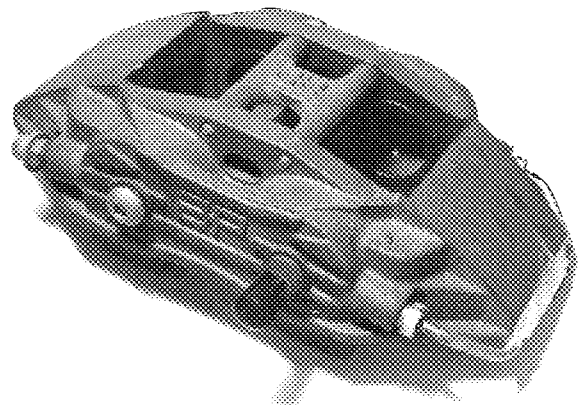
FRONT AND/OR REAR BRAKE CALIPER TYPE 7
